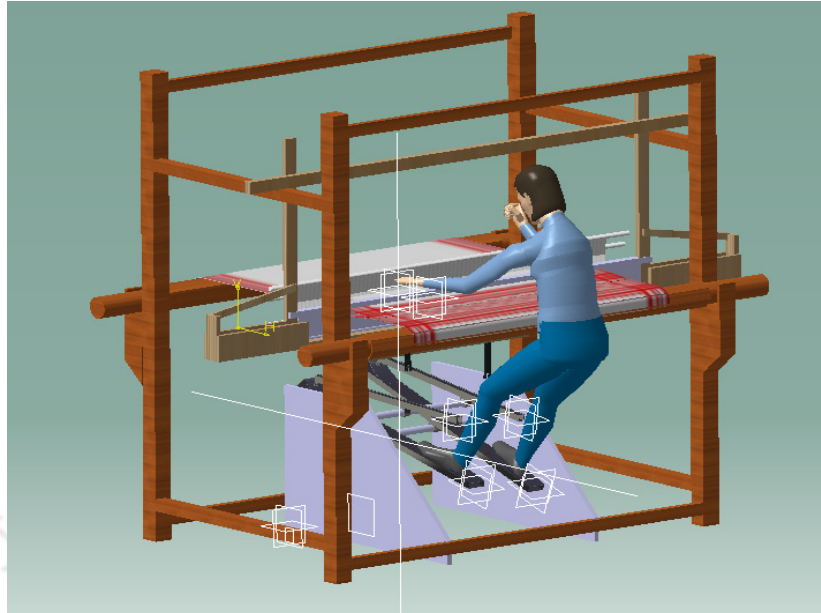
CAD drawing of modified pedal operation where only foot control is shown
